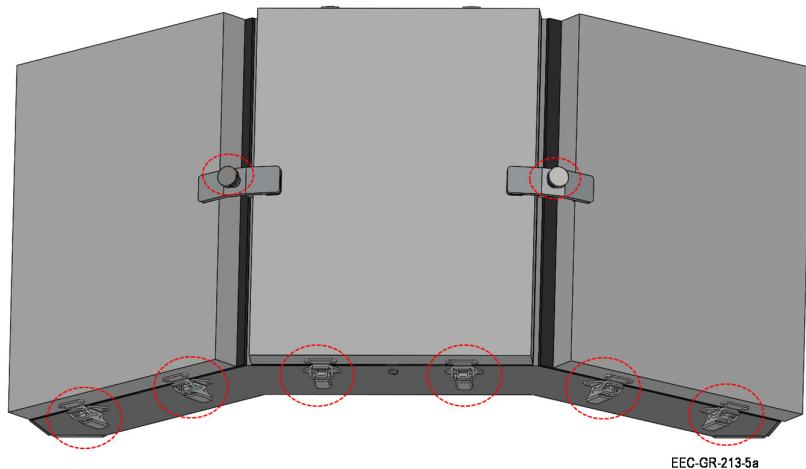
Plenum Assembly – Cover Retaining Screws and Latches
